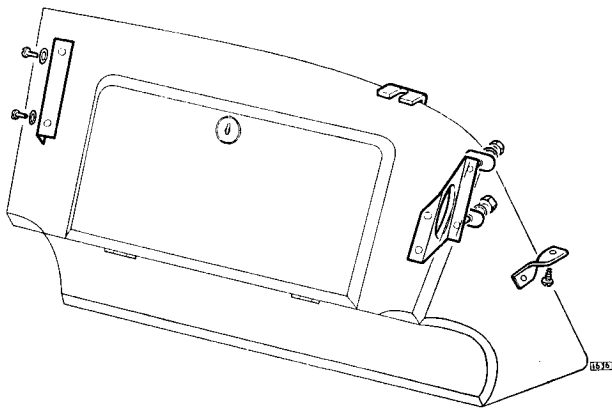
The glove box, showing the three sets of attachment details, the forked bracket in the top edge secures one side of the screen rail.
